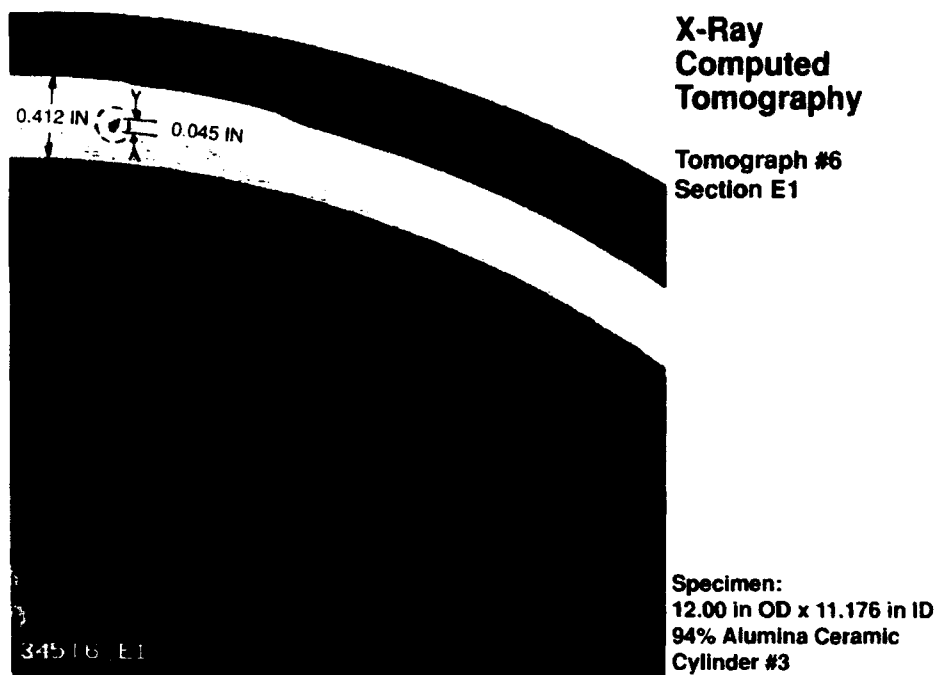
RCT slice through a large flaw in cylinder #3. The measured size of indication cross section is 0.045 inch. The SAM indication of this flaw is shown in figures E-11 and E-12.
